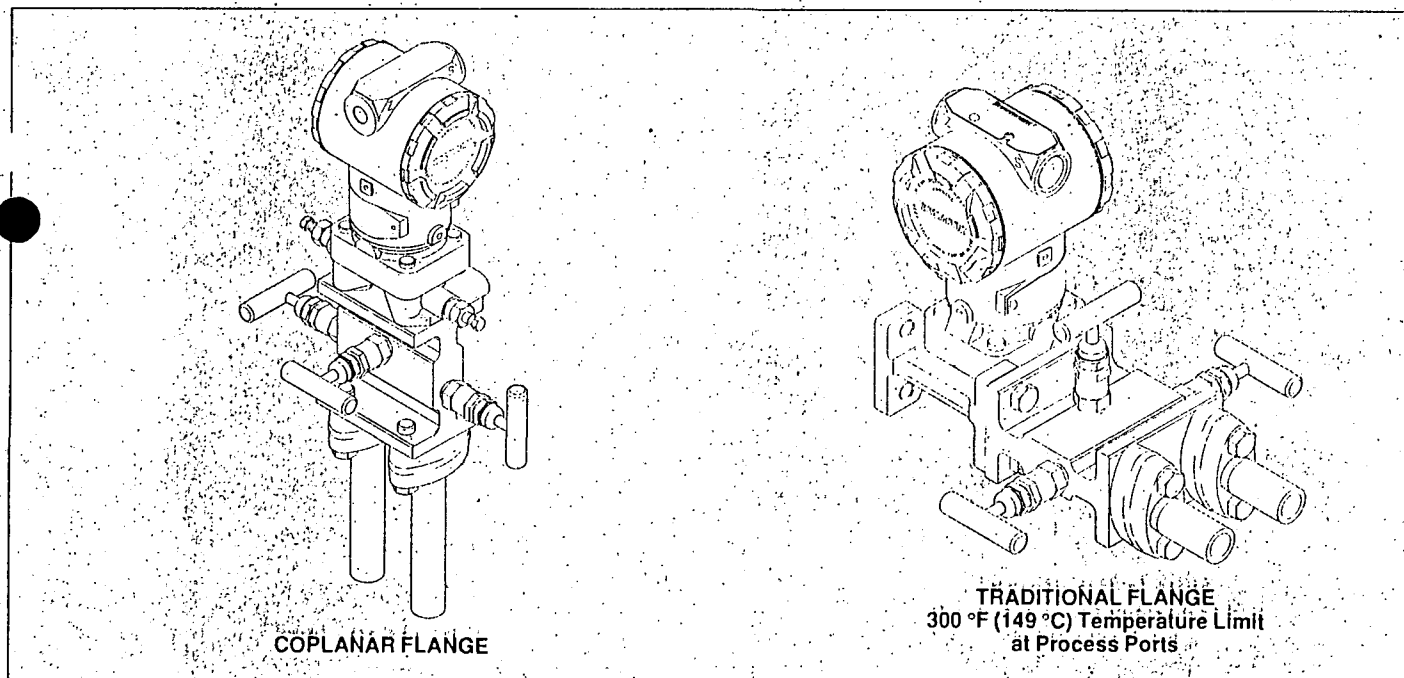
Coplanar and Traditional Flange Options Connected to a Three-Valve Manifold
